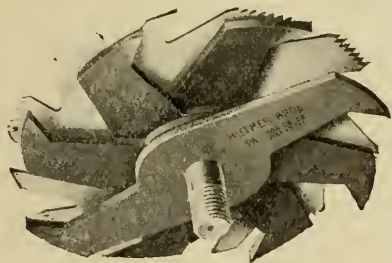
ILLUSTRATING PARTS OF DADO HEAD
